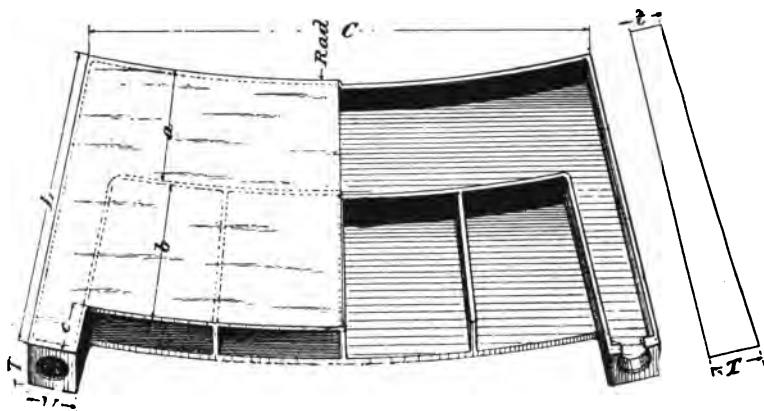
Gayley plate. (Best Manufacturing Co.)
